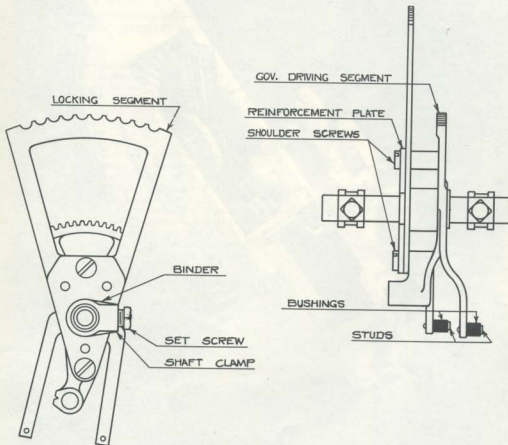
MASTER SWITCH GOVERNOR DRIVING SEGMENT ASSEMBLY
